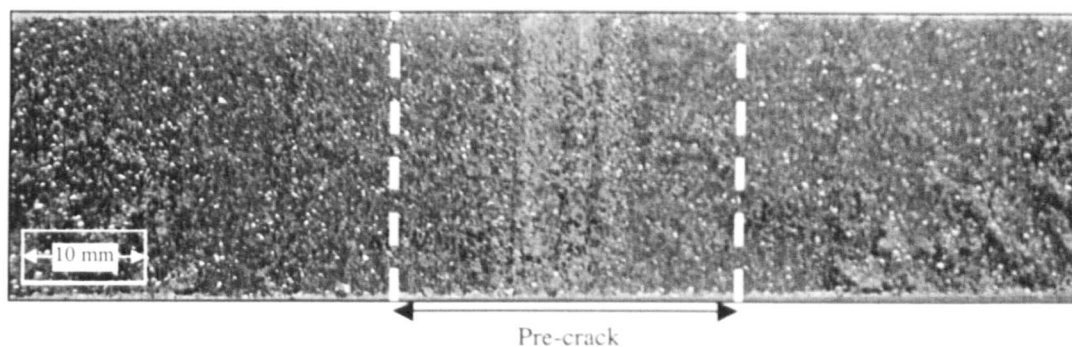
Fracture surface of the face-sheet material from a CNFS specimen of Structure P.
